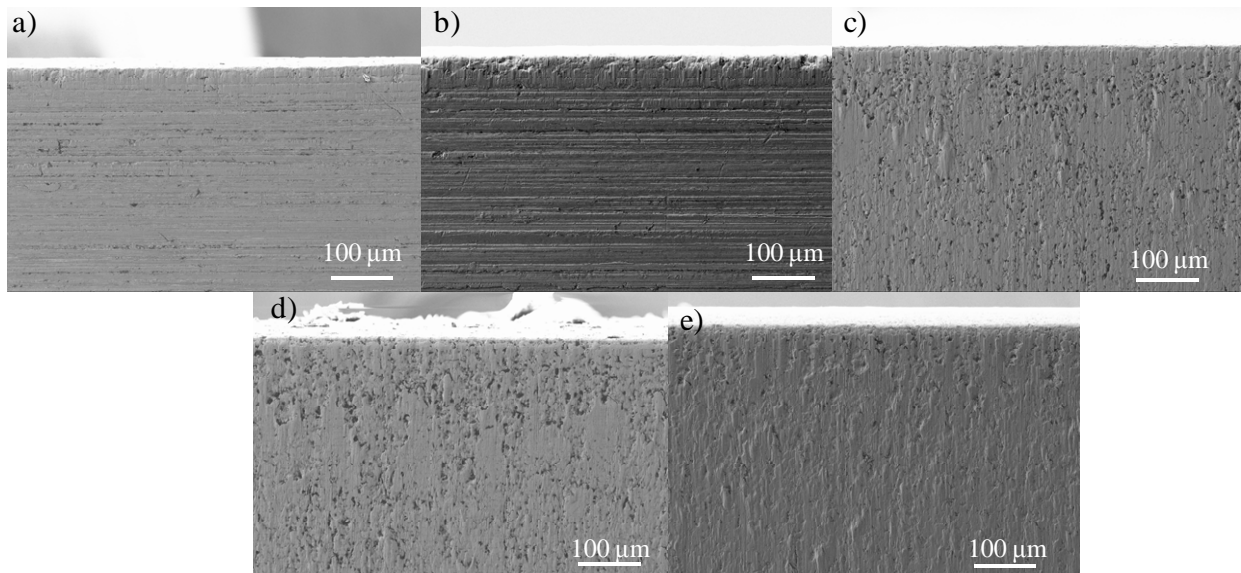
Fractography of the 1.2379 upper tool at increasing number of strokes: a) 16000; b) 22000; c) 26000; d) 31000 and e) 36000
